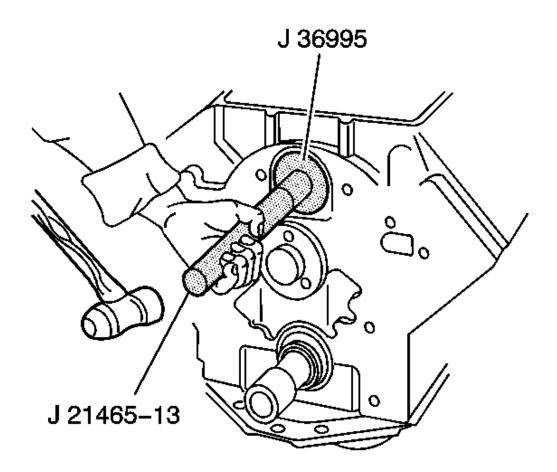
Installing Balance Shaft Bearing Courtesy of GENERAL MOTORS CORP.
